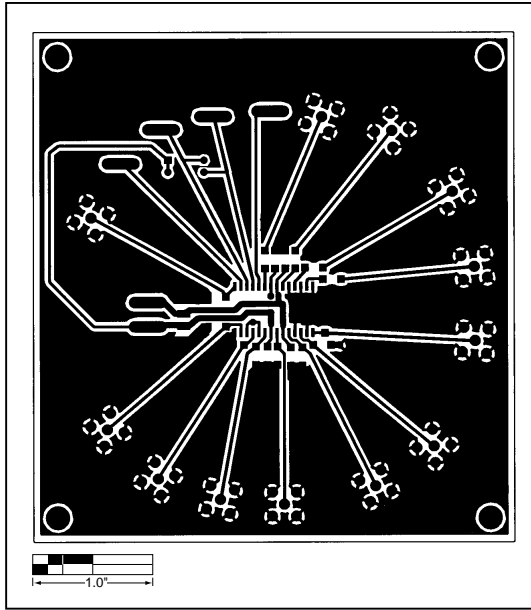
MAX498 EV Kit PC Board Layout—Component Side (5/8x scale)
